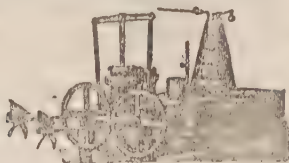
Engine, Boiler, and Screw-Propellers, used by Stevens, 1804.
